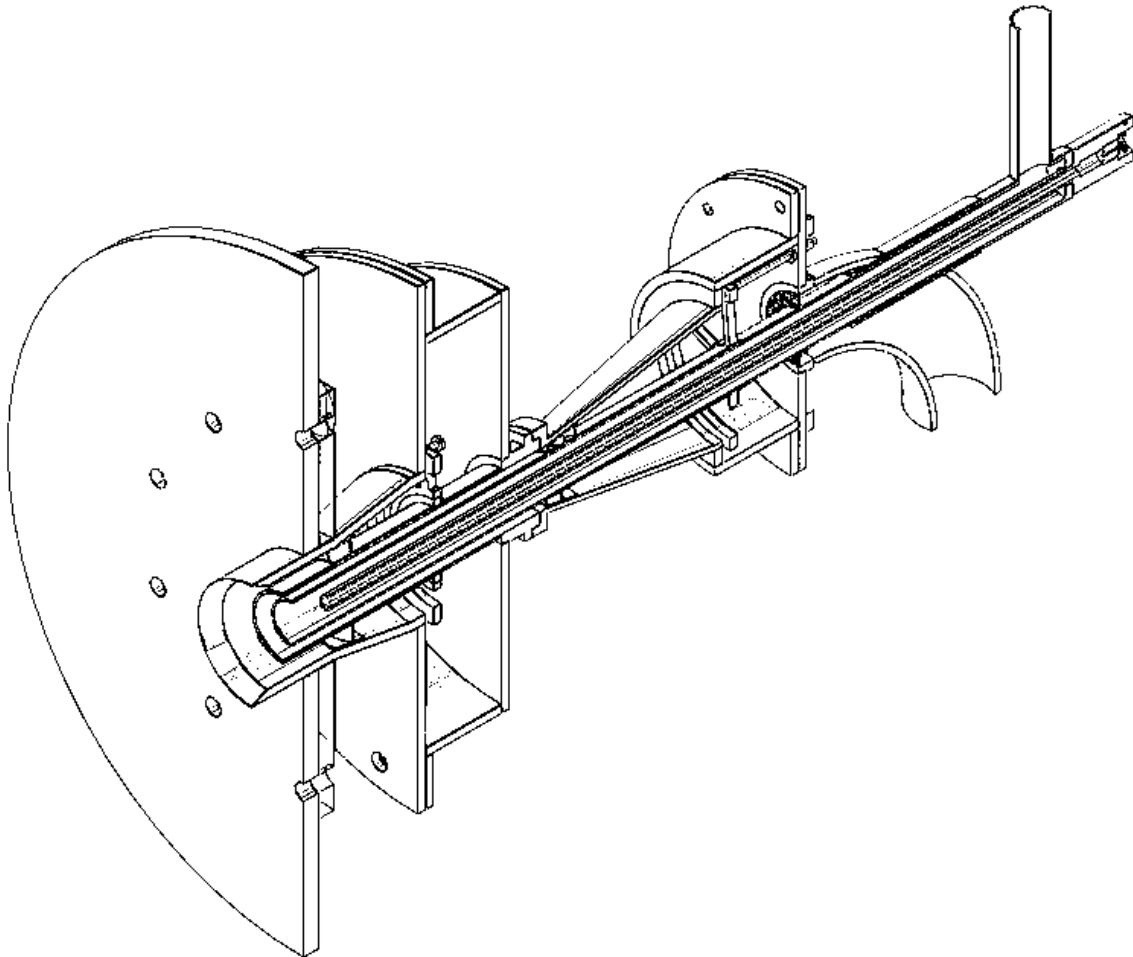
SECTION VIEWS OF PC BURNER AND COMBUSTION CHAMBER ASSEMBLY MODEL
